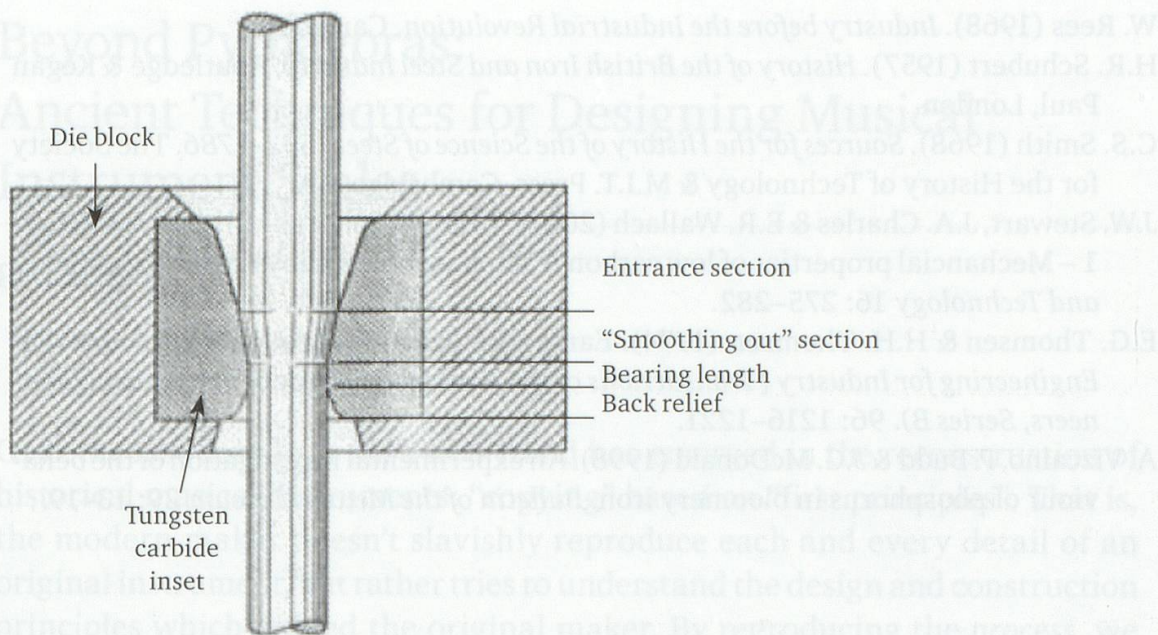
Typical arrangement for diameter reduction in the wire drawing process.
